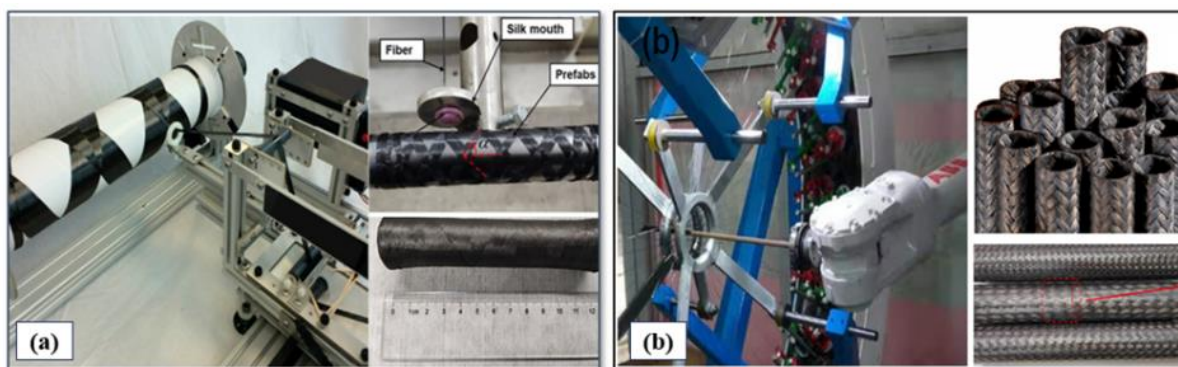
Forming processes for SiC_f/SiC composite cladding tubular preforms: (a) winding equipment and wound tube [162]; (b) weaving equipment and woven tube [163].
